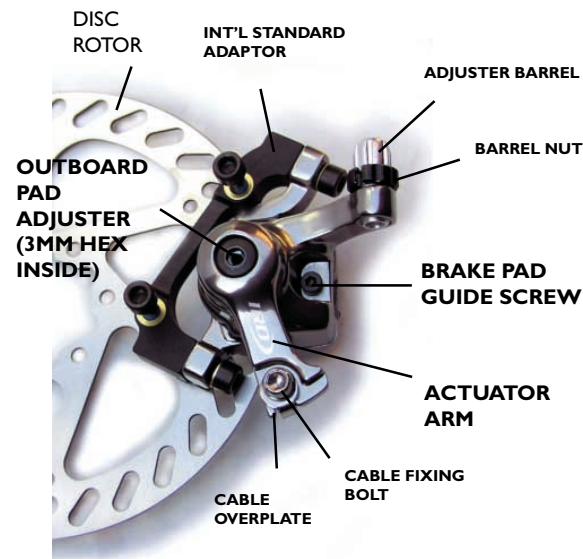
REAR DISC BRAKE DOES NOT NEED THE INT'L STANDARD ADAPTOR. IT BOLTS RIGHT ONTO FRAME
